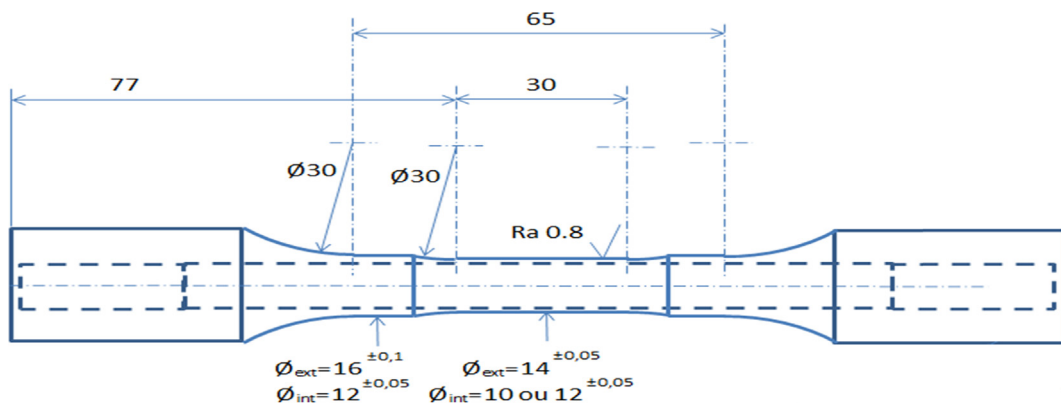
Geometry of specimens for combined loading fatigue test with internal pressure.
